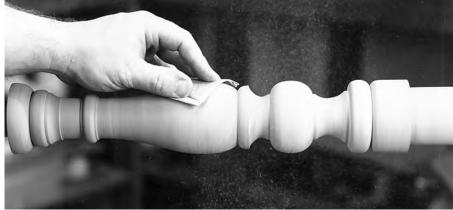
When you sand on the lathe, fold quarter sheets of sandpaper into thirds to protect your fingers from the heat build-up.
